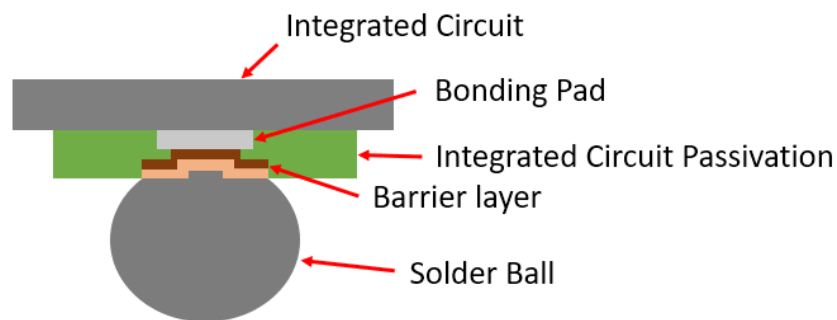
Schematics of solder interconnects, illustrating bonding pad, integrated circuit (IC), IC passivation, UBM, barrier layer, and solder ball.
